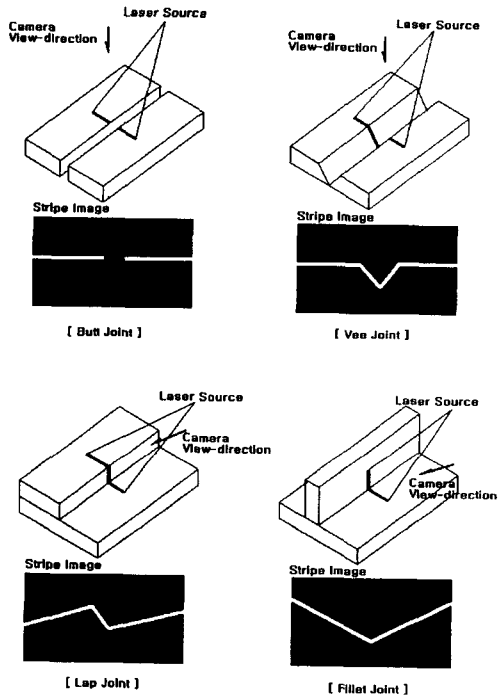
Four typical weld joints with laser stripe image and camera view-direction
